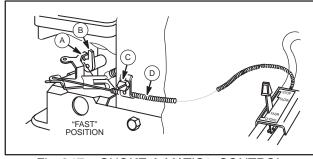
CHOKE-A-MATIC® CONTROL, TYPICAL
